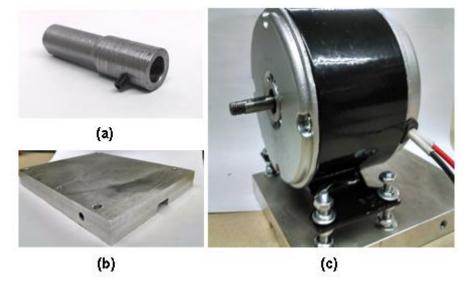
(a) Machined coupler for generator shaft to variable motor coupler. (b) Machined baseplate for generator. (c) Generator on the base and secured with adjustable hardware.
